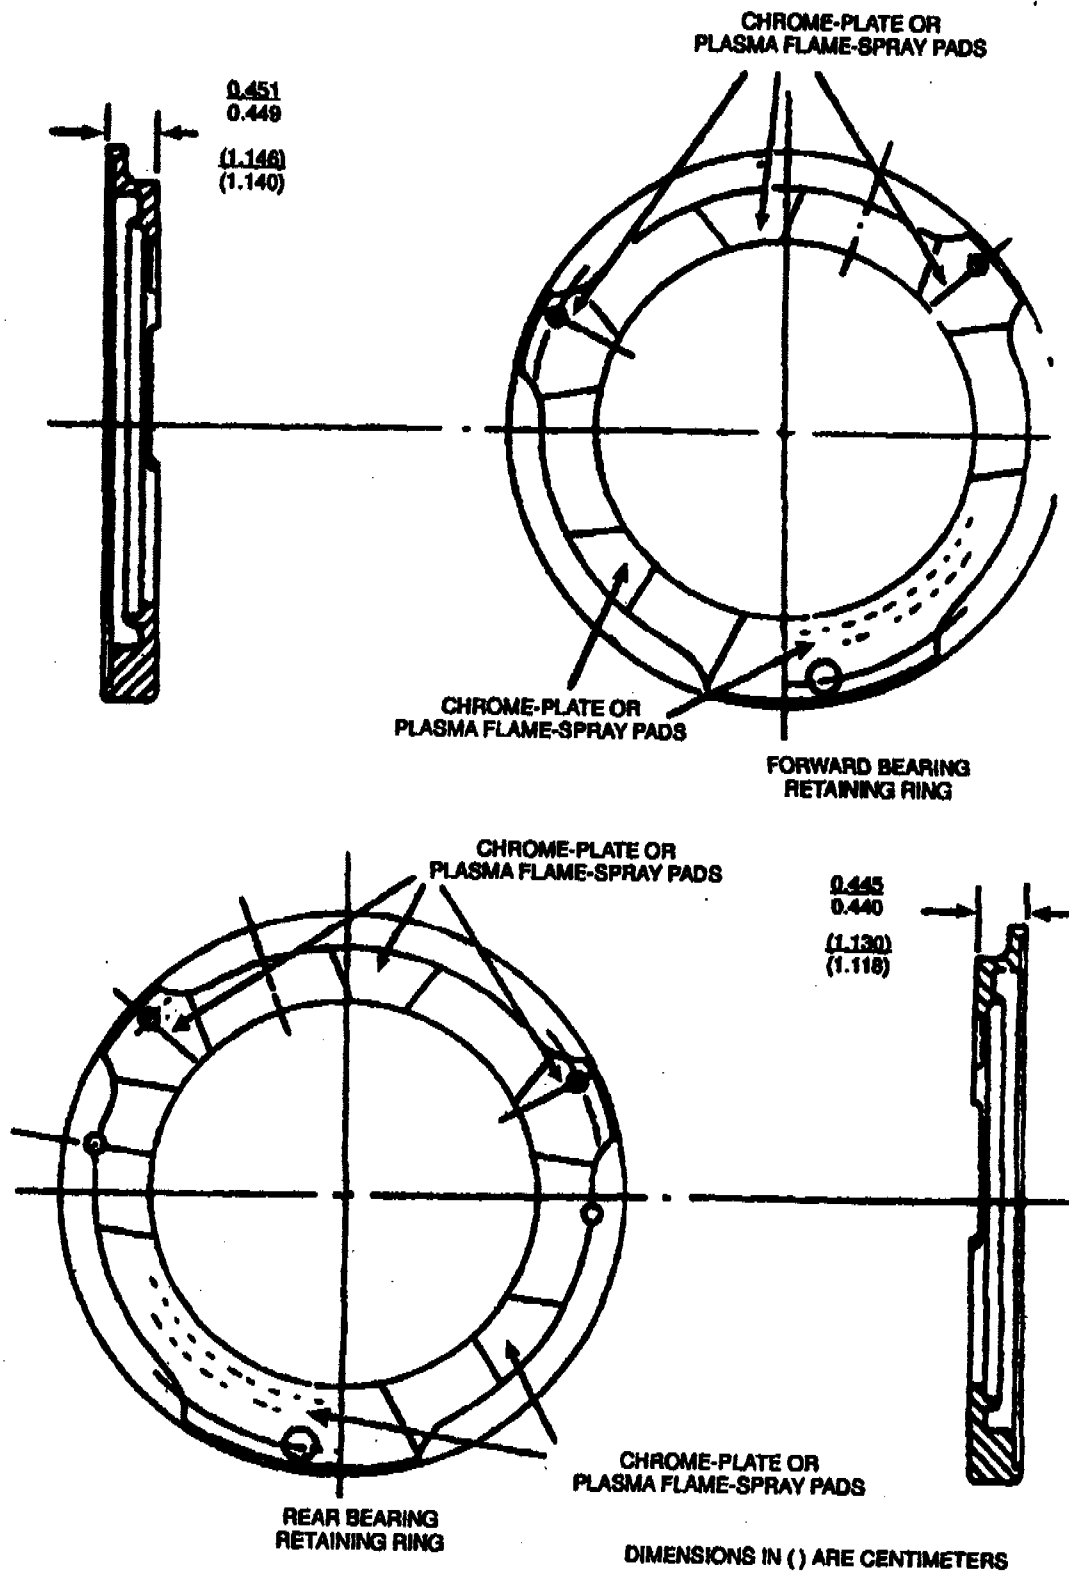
Forward and Rear Bearing Retaining Rings - Inspection and Repair.
